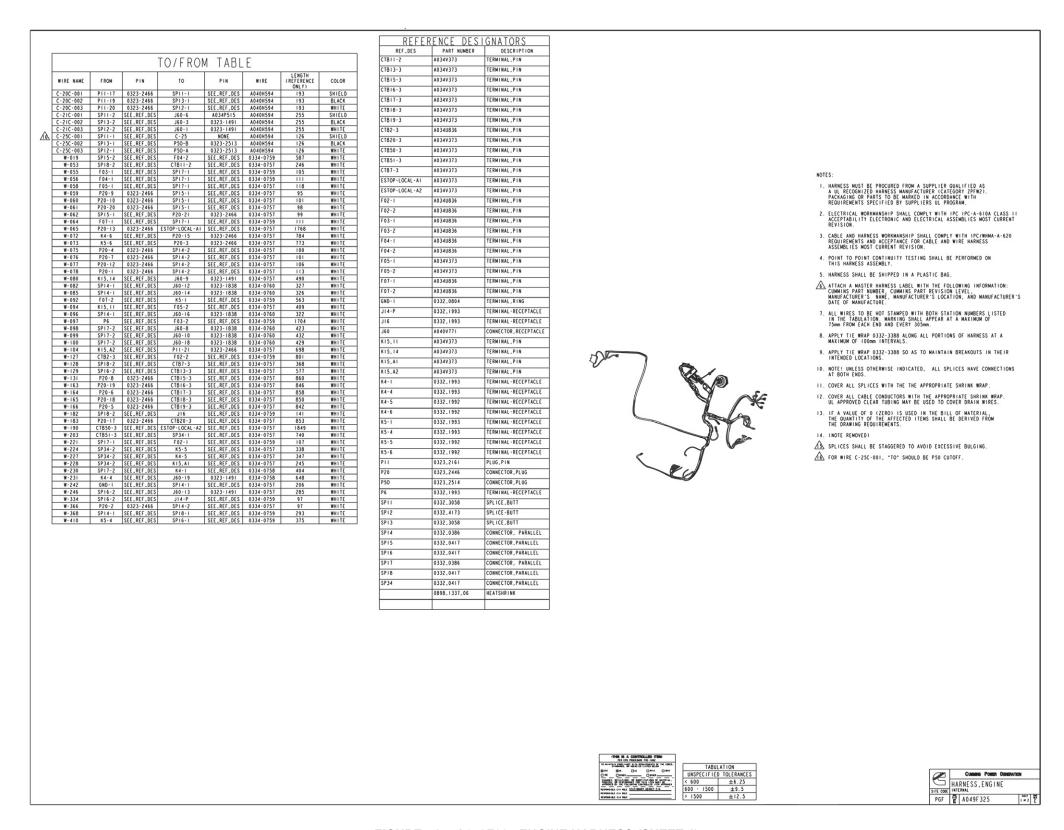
A049F325 ENGINE HARNESS (SHEET 1)
